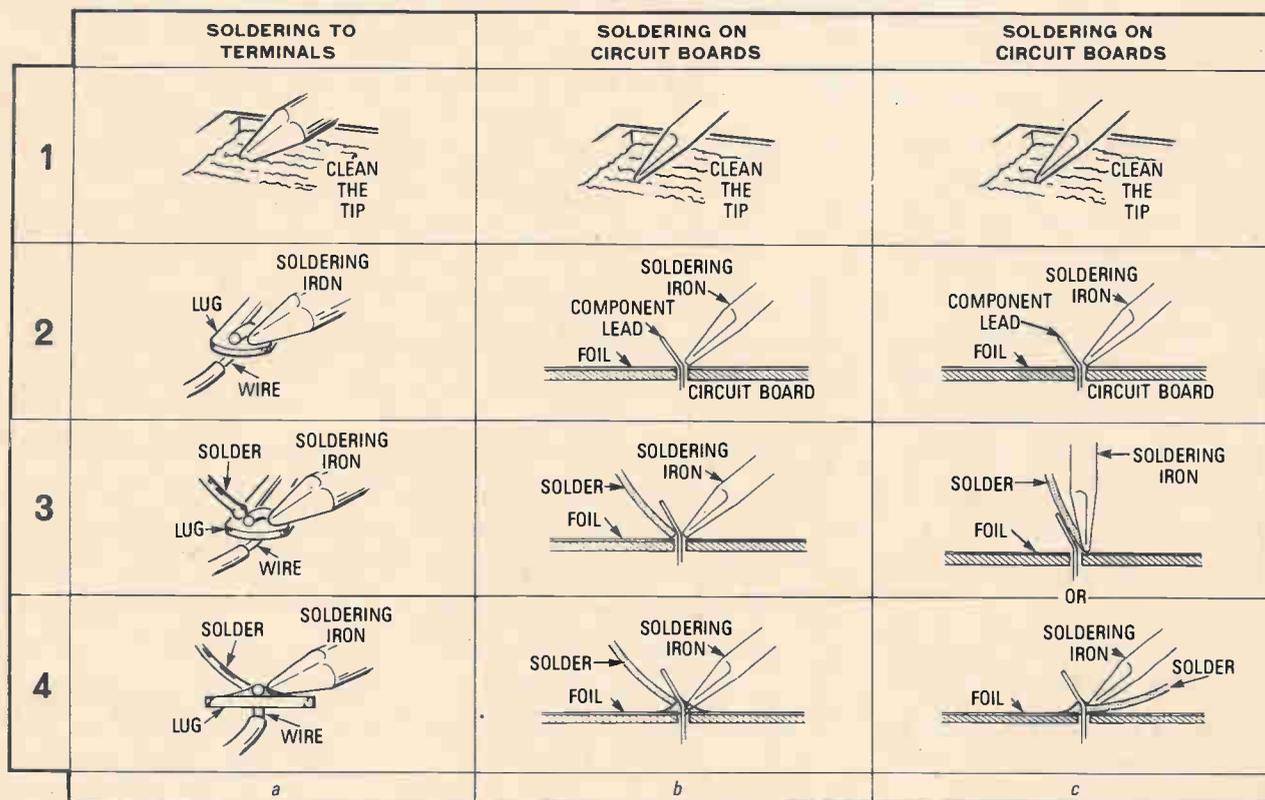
Although the usual practice is to heat the material to which solder will be applied (as shown in a and b), when soldering hairline printed-circuit traces, the heat is applied to the solder (c).
